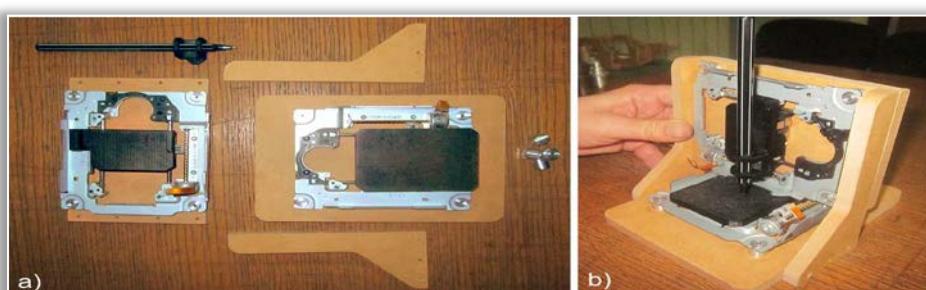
Prepared components before assembly (a) and initial assembly (b)
